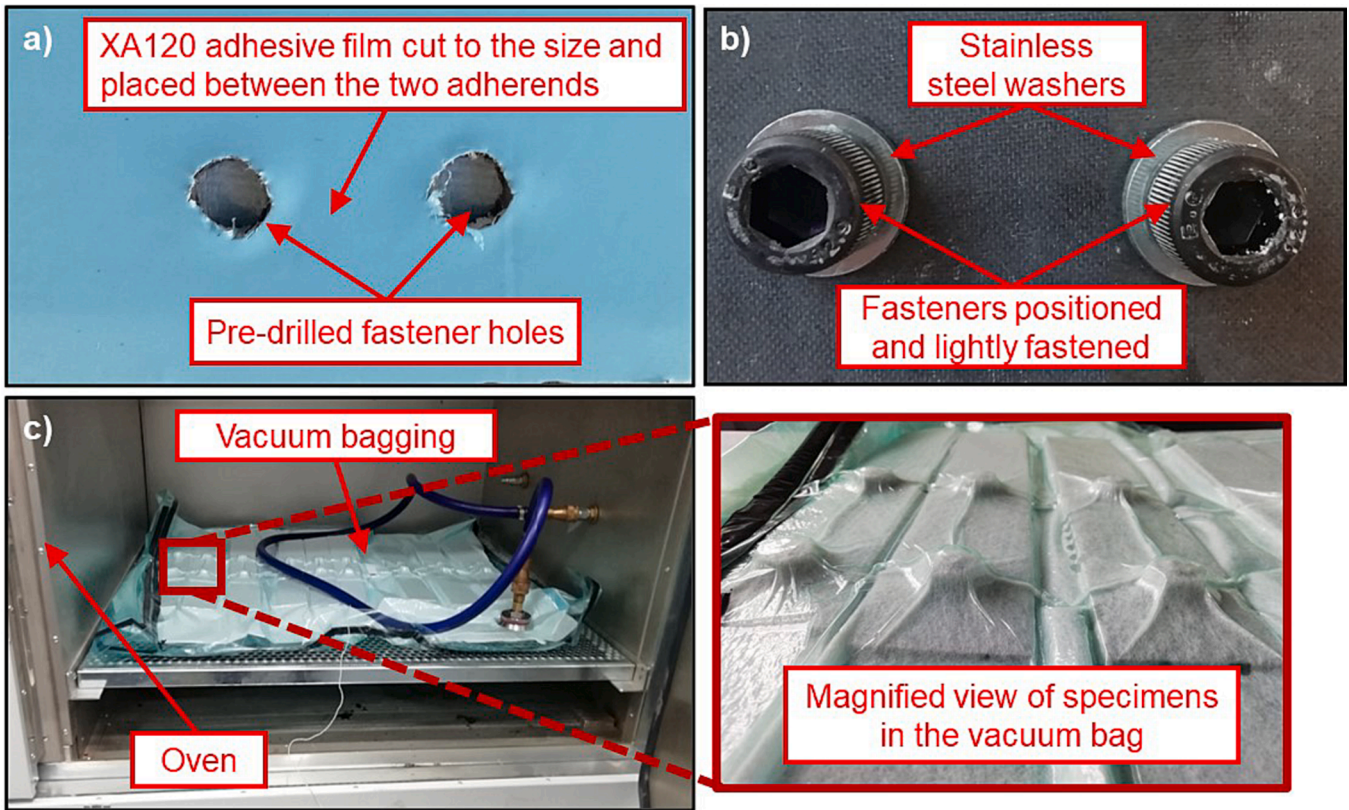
Sequence of activities in the manufacture of HJs, a) cutting XA120 film to size, b) lightly tightening fasteners using 3N.m torque, c) placing the vacuum bag in the oven.
